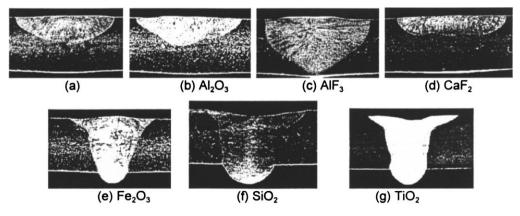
Cross-sections of the weld beads in 5 mm plates and 220 A for: (a) conventional TIG and (b-g) ATIG welding.
